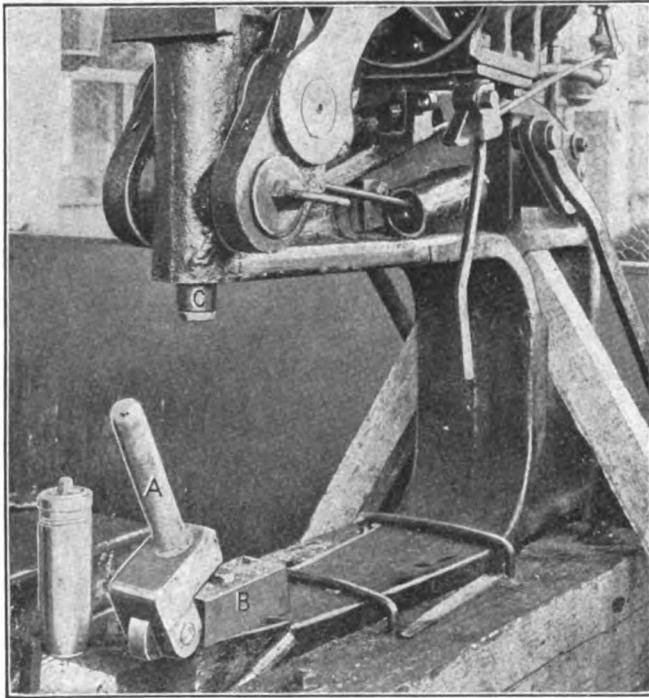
MURPHY PNEUMATIC RIVETER FORCING IN BASE PLATES
